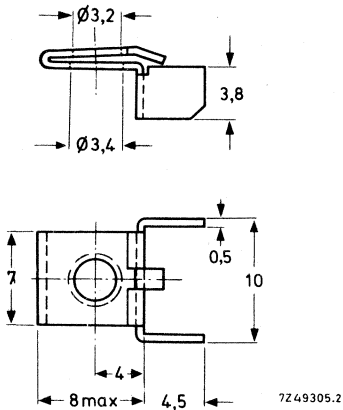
Cadmium plated steel mounting bracket 4332 026 06540.
